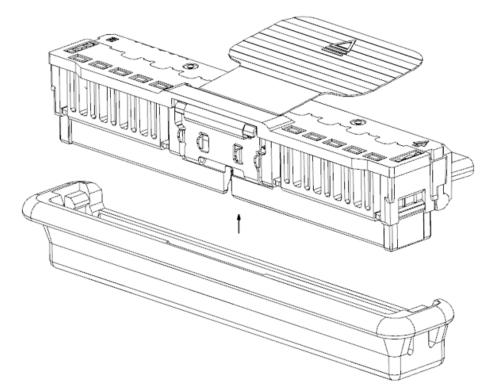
Free-Side Connector & Dust Cover Assembly Direction
